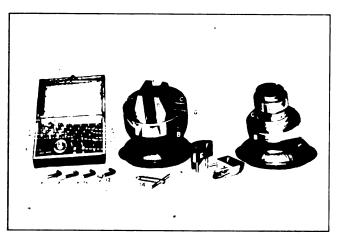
Regular and Keyless Engraving Blocks and Attachments
